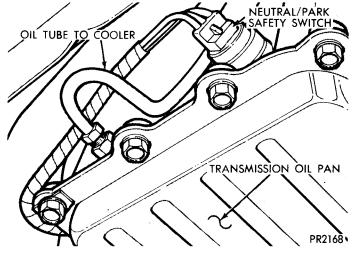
Remove or Install Lower Cooler Tube and Wire to Neutral/Park Safety Switch
